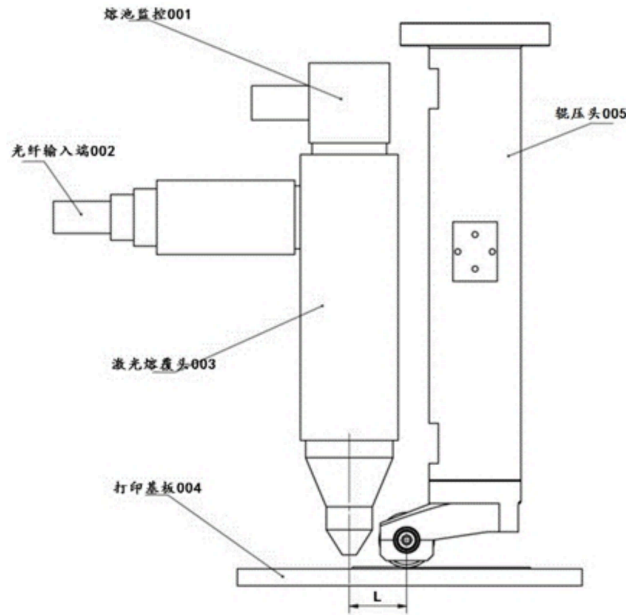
Patent CN11483353A's drawing of a DED head (left) and roller press (right)
